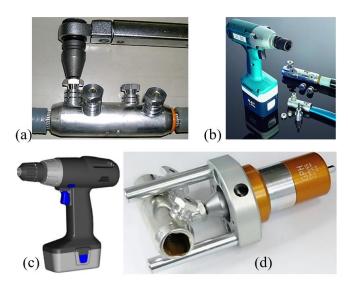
Tools for installation of mechanical connectors / lugs: (a) torque wrench, (b) impact wrench, (c) cordless screwdriver, (d) torque amplifier.
